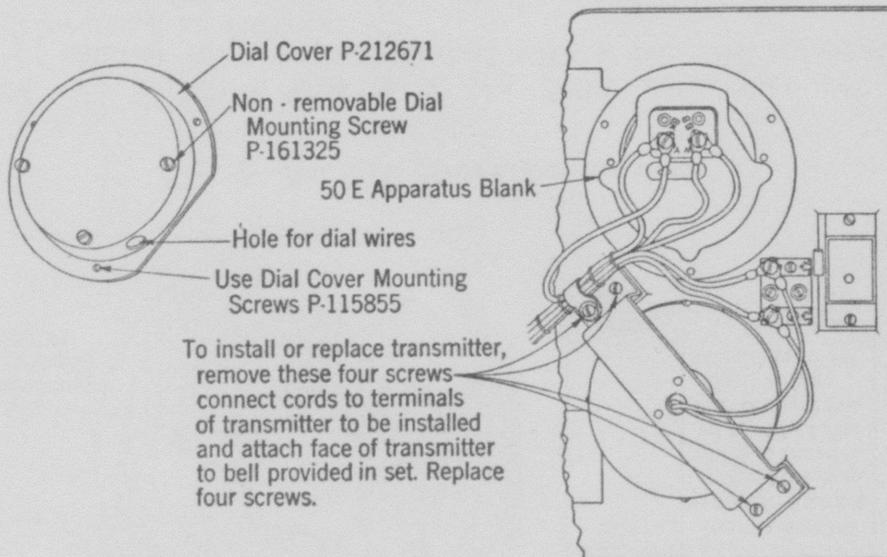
Rear View of Inner Door No. 530A Set (Apparatus Blank in Place)
